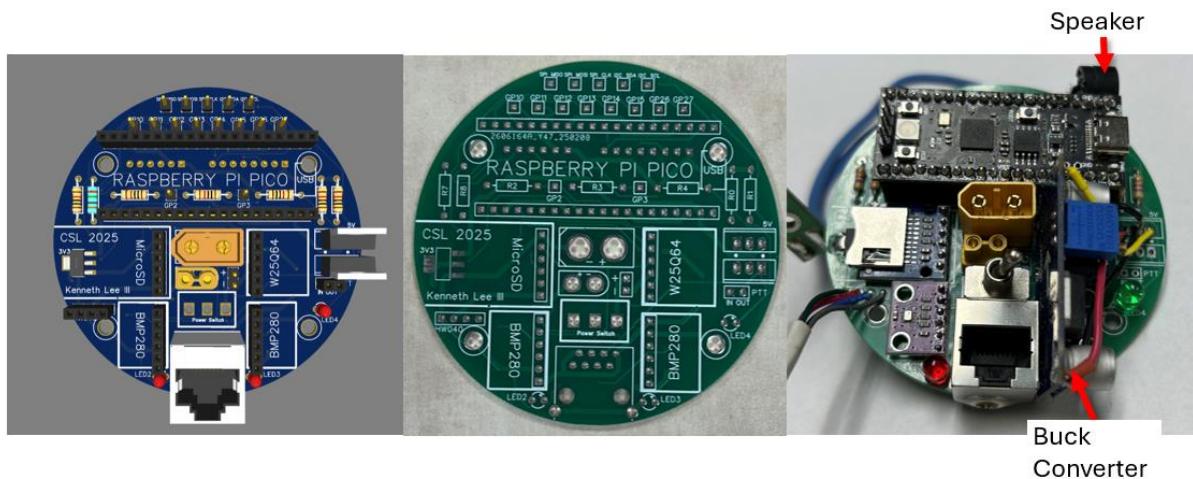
Top of Airbrakes PCB from EasyEDA to non-soldered to soldered.
